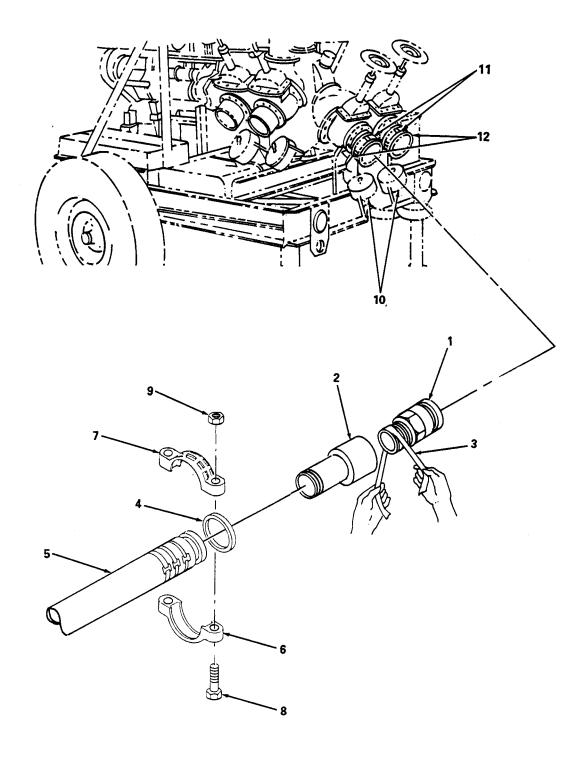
Attaching Suction Hoseline to Pumping Assembly.
